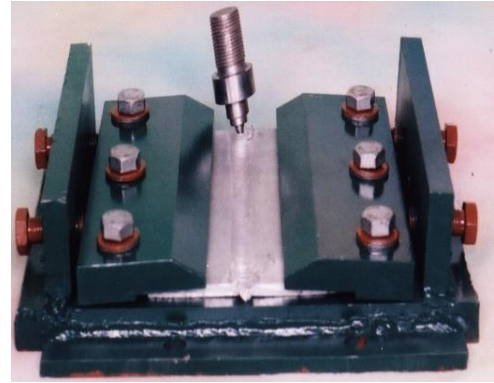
FIXTURE USED FOR HOLDING THE SPECIMENS
